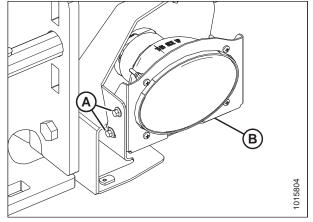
Right Side Headlight Shown – Left Side Similar
